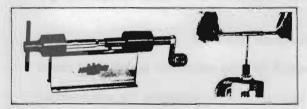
Because of the two-caliber "jump" (from .308 to .257), the necks have thickened and must be reamed, either with a special die (left) or with a lathe-type unit.
